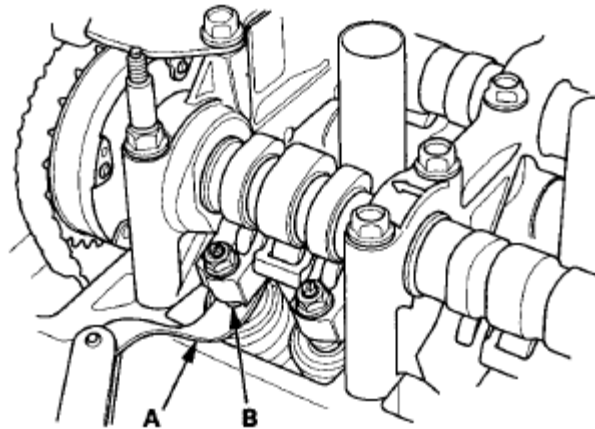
Inserting Feeler Gauge Between Adjusting Screw And Valve Stem
